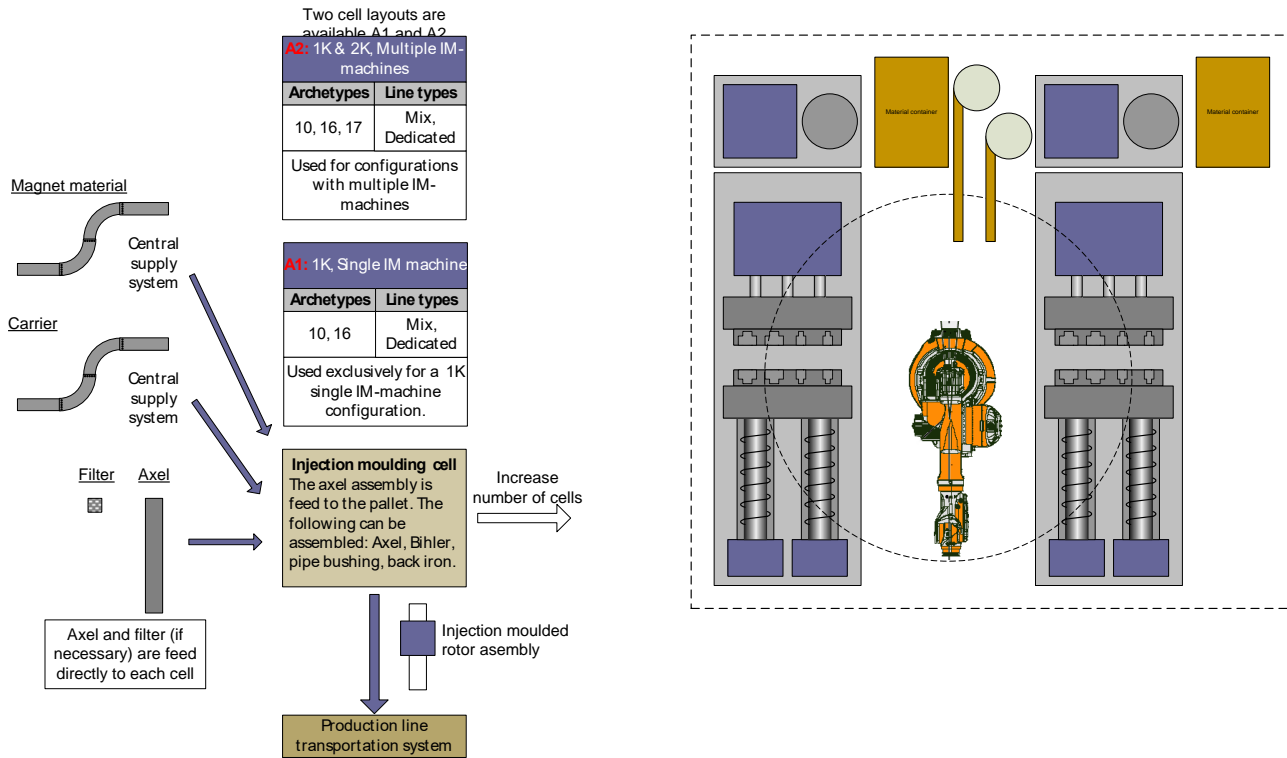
Example of a simple concept drawing for an injection molding cell with two different setup types
